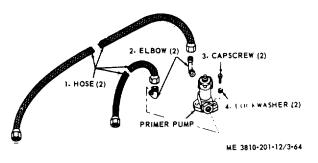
Primer pump (for engine model 687C-18-ES) removal and installation.
